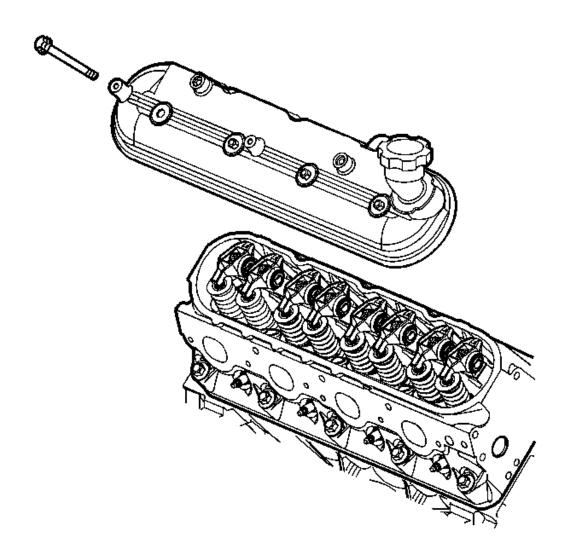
View Of Valve Rocker Arm Cover & Bolts (Right) Courtesy of GENERAL MOTORS CORP.
